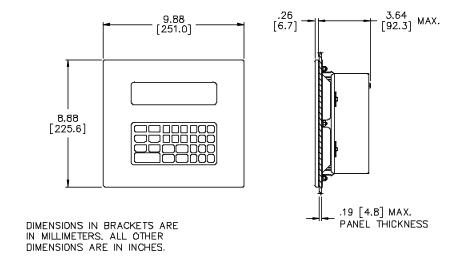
660, 661, 662 Panel Mount Outline Drawing
